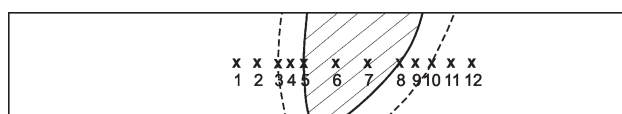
Cross-section hardness measurement on a real welding sample
